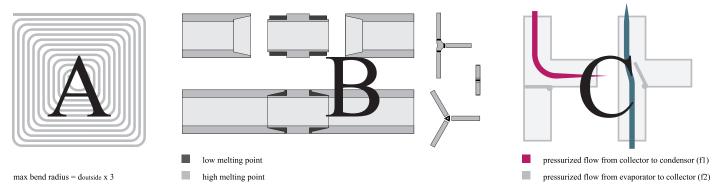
Modularity Issues, tube bending (A), tube connection (B) and cheap valves (C).
